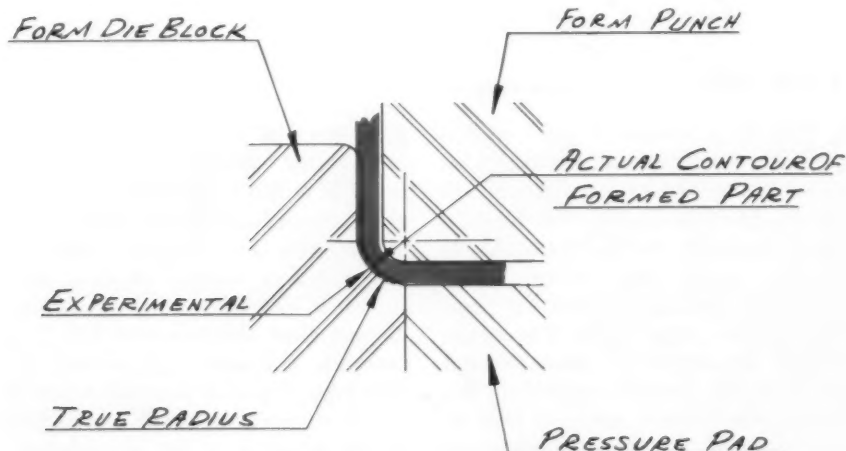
is a variation of the U-type form which is used to control spring back in hardened material where coining of the material would cause a fracture of the corner or would be altogether impossible.
